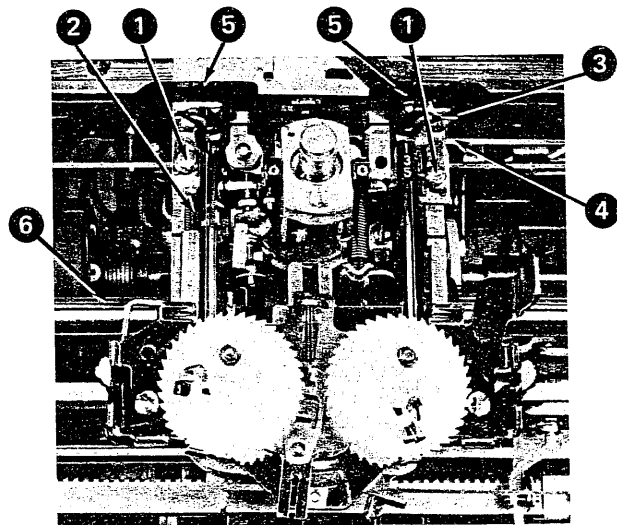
Carrier and Rocker Removal (Steps 2-13)
